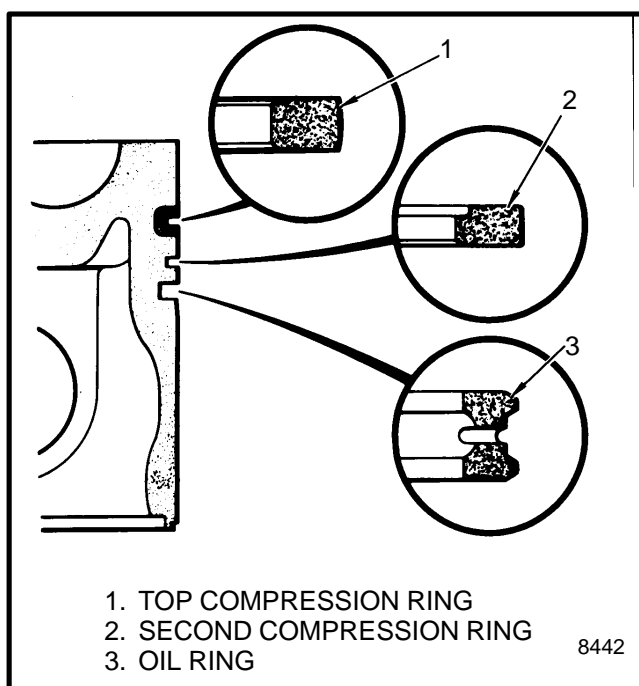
PISTON RINGS (4.2482 ENGINE)
